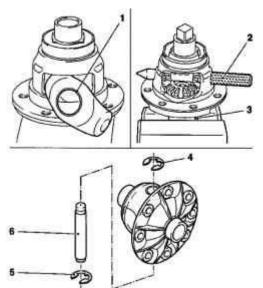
Building housing the differential: 1 - Ring 2, 3 - a special tool, 4, 5 - retaining rings, 6 - cone axis
